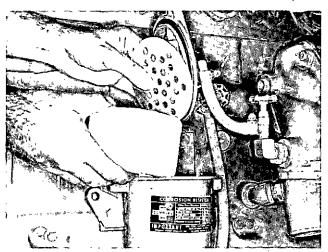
(N11901) Changing corrosion resistor element-package type
